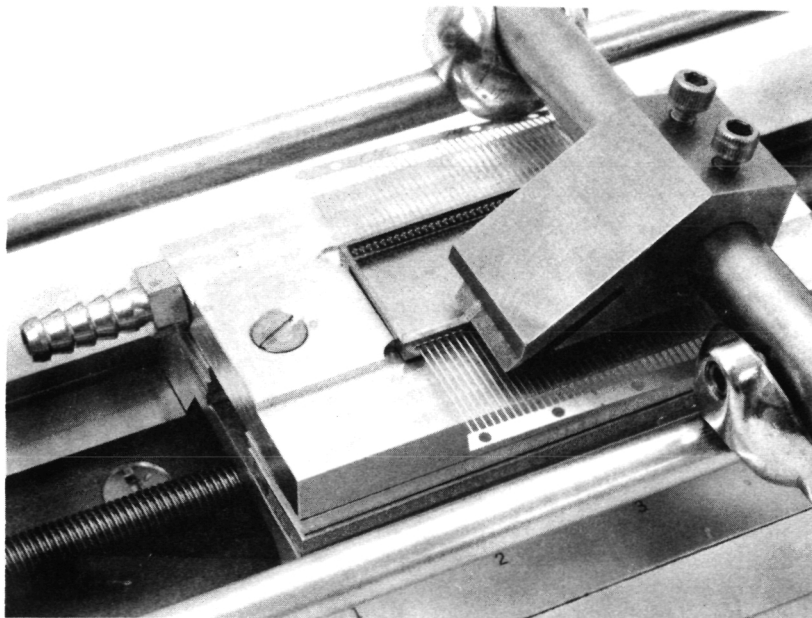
Close-Up View Of Adhesive-Removal-Knife Attachment Removing Cured Adhesive From Package Rim
